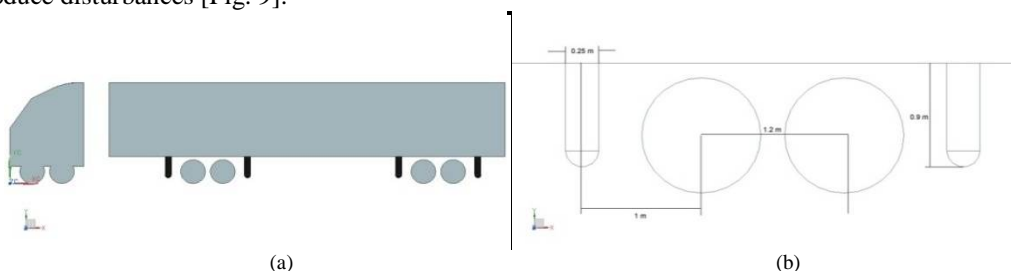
(a) Mounting of the wheel air deflector 1; (b) Dimensions of the wheel air deflector.
